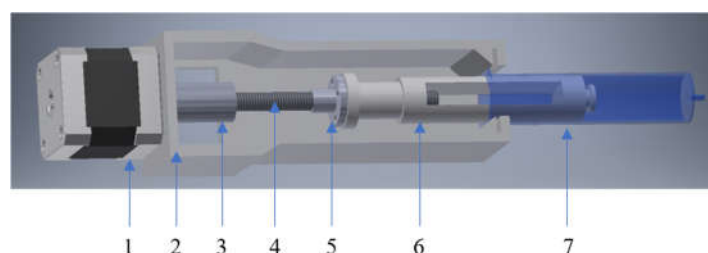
The assembly of the viscous “ink” extruder comprises the following components: 1- stepper motor, 2- housing, 3- coupling sleeve, 4- trapezoidal screw, 5- trapezoidal nut, 6- piston, 7- container for viscous “ink”.
